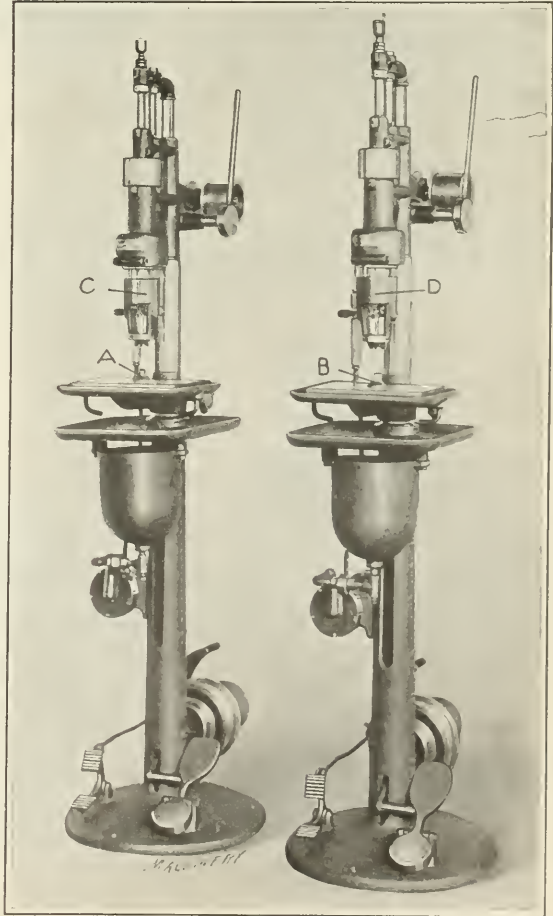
Drilling Machines that drill Two Holes in Percussion Plunger
